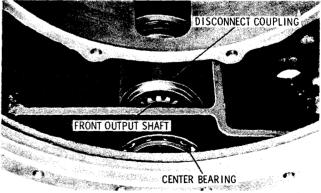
Disconnect coupling, front output shaft, and center bearing
